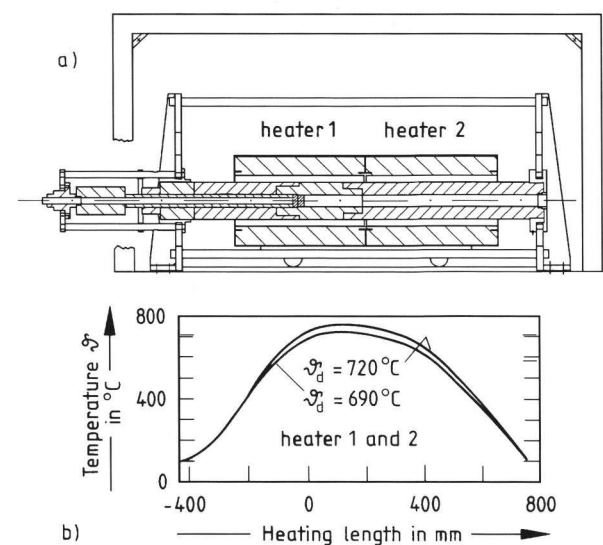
60 kN-laboratory plant for continuous pull extrusion.
